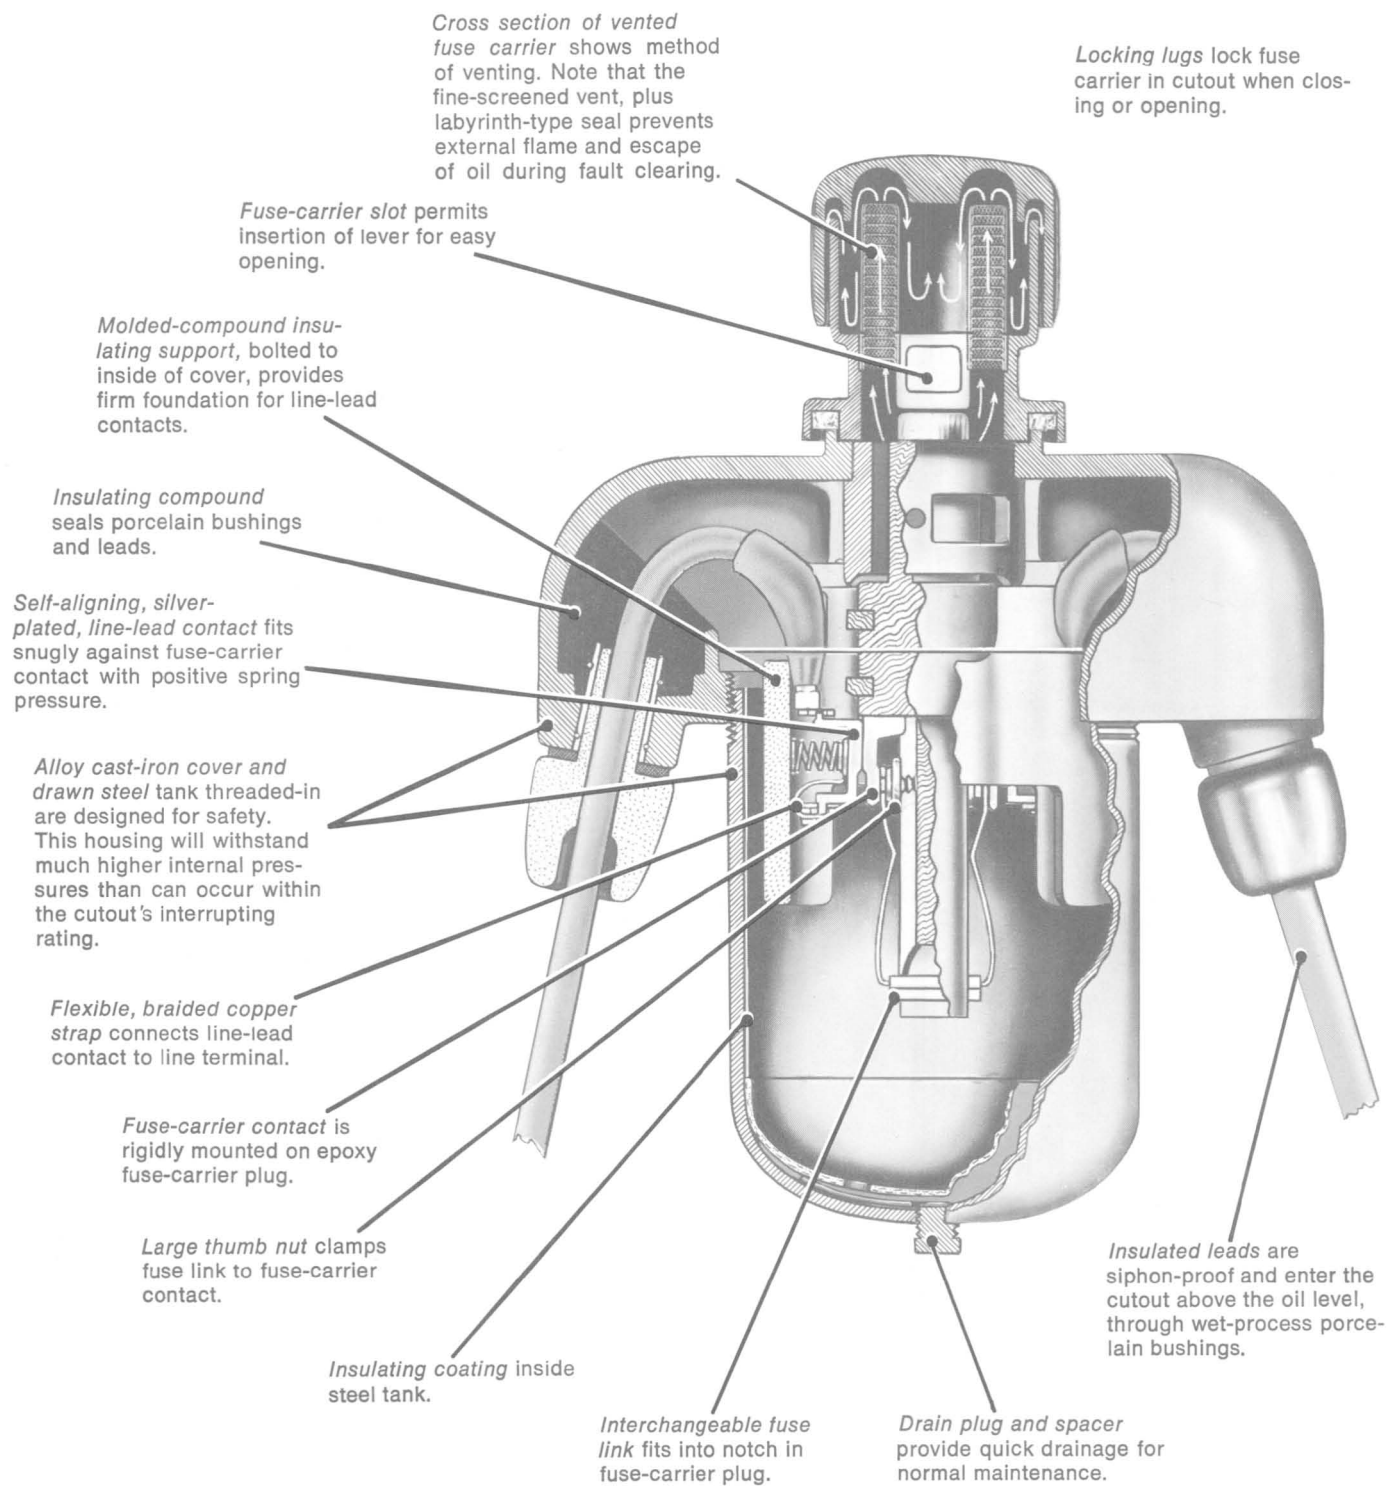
Sectional drawing of sealed oil cutout — 5.2 kv, 100, 200, 300 amp; 7.8 kv, 200 amp.
